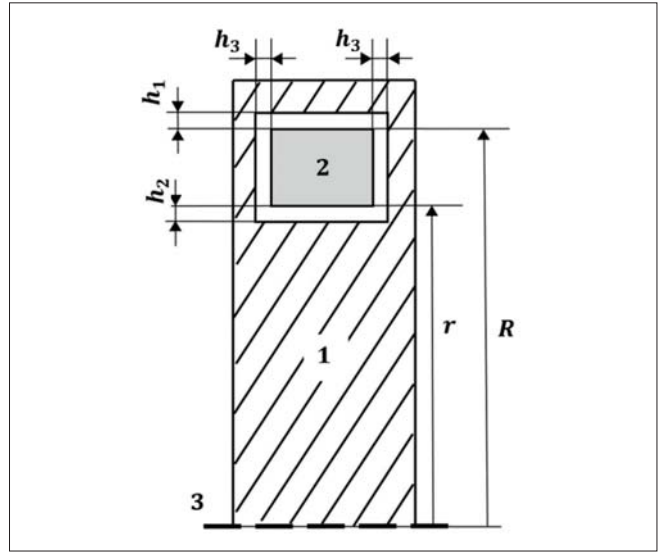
The viscous damper: 1 – housing; 2 – inertia ring; 3 – shaft axis; – inner radius of the inertia ring; – outer radius of the inertia ring
